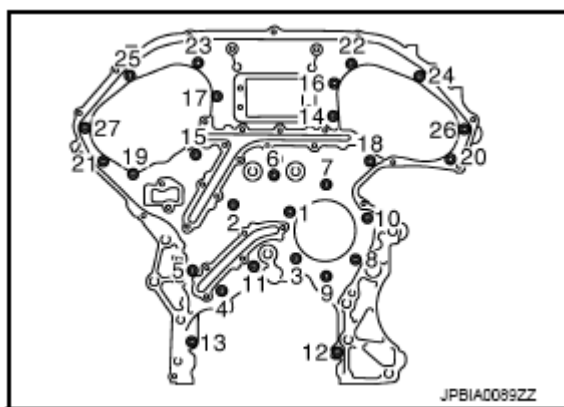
Identifying Front Timing Chain Case Mounting Bolts Tightening Sequence
